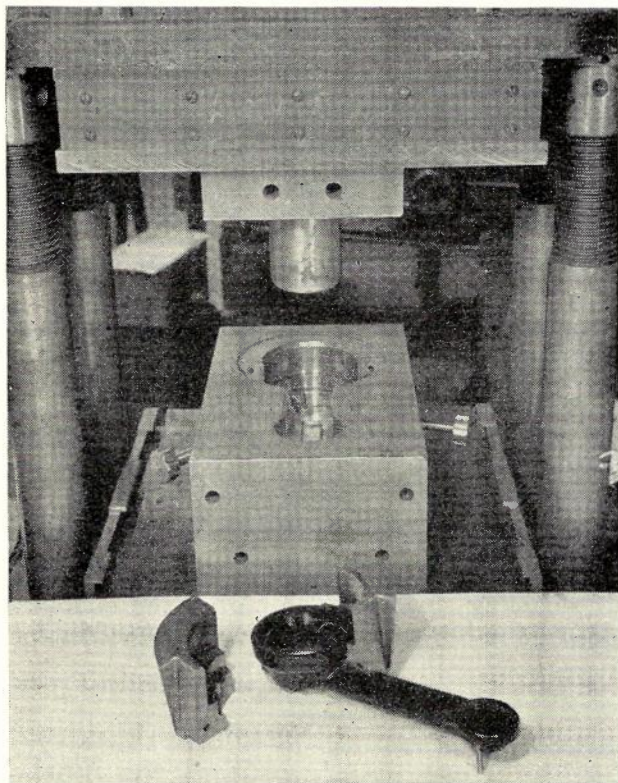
Dial Housing Component. Top and bottom forces "set up" in moulding press.
